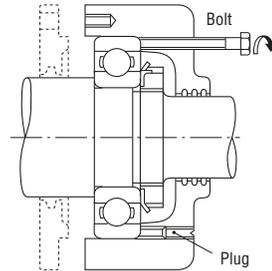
Removal of Outer Ring With Dismounting Bolts
